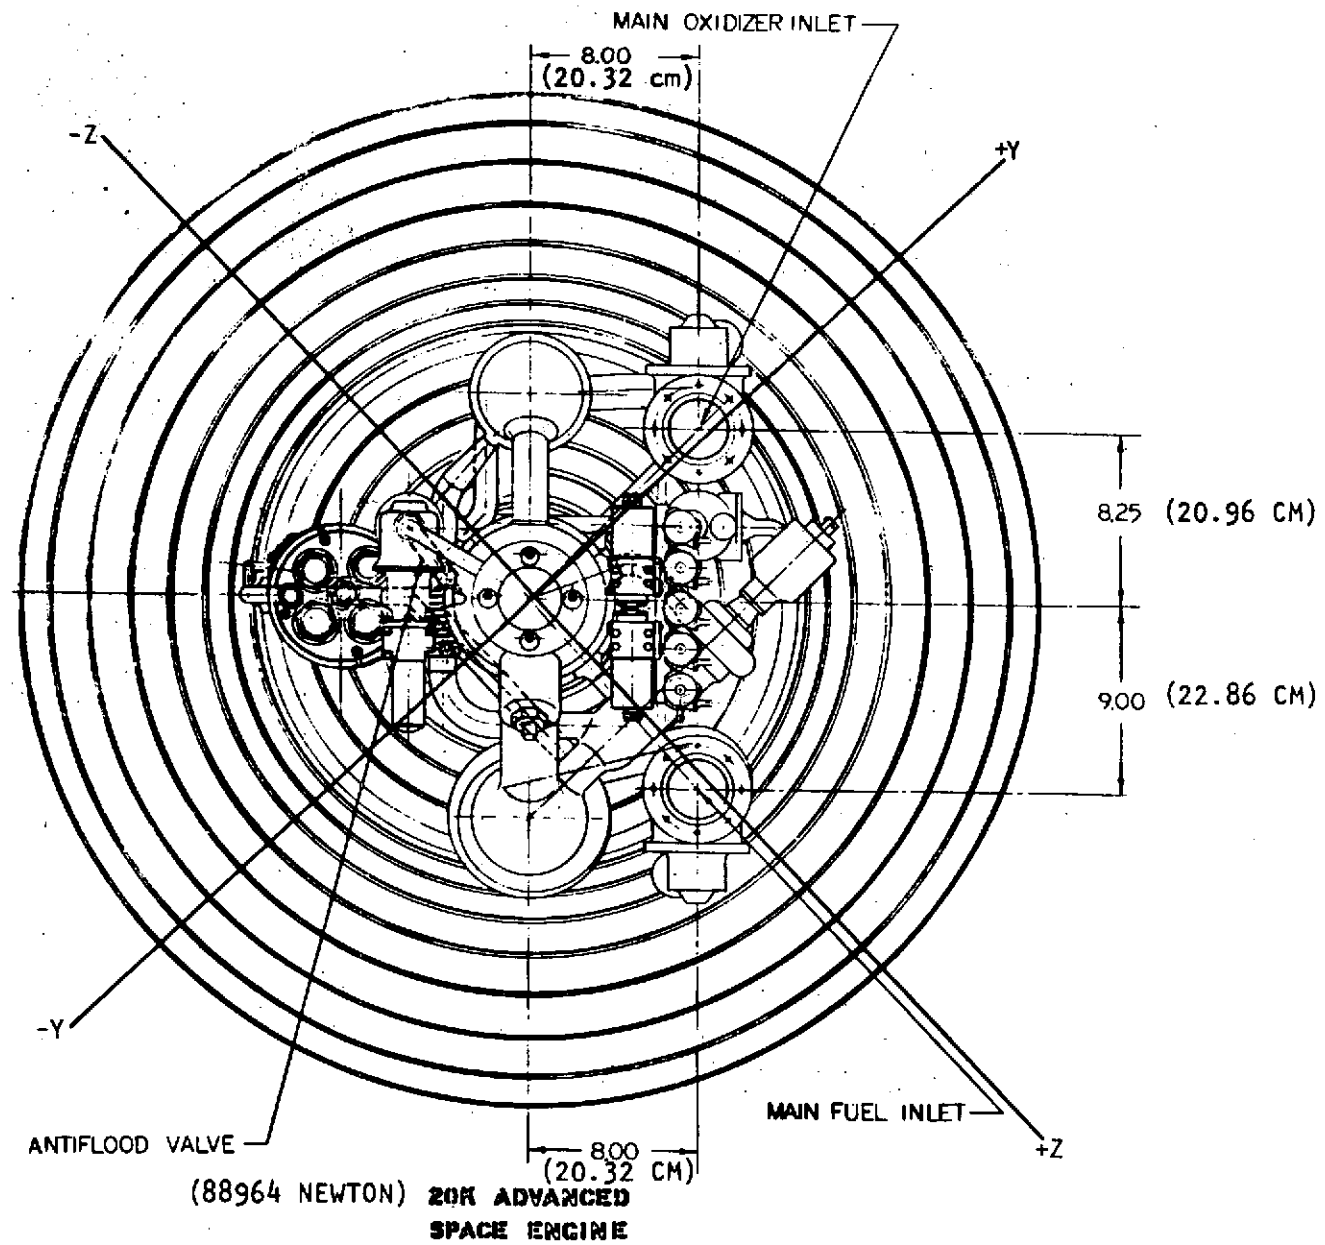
Advanced Space Engine, Aft View Showing Y- and Z-Axes
